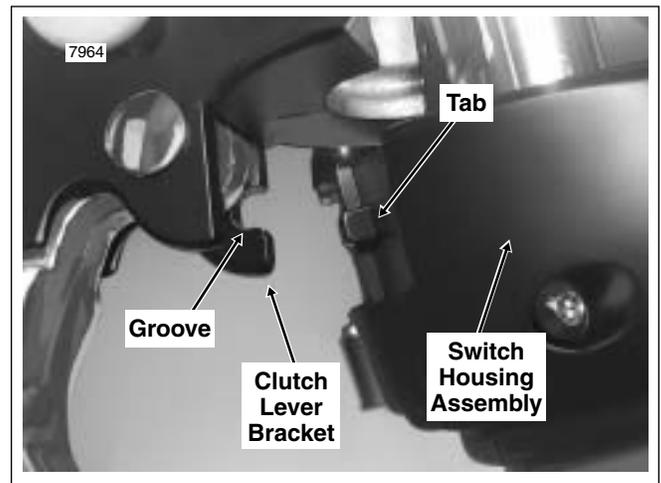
Fit Clutch Lever Bracket to Left Handlebar Switch Housings
